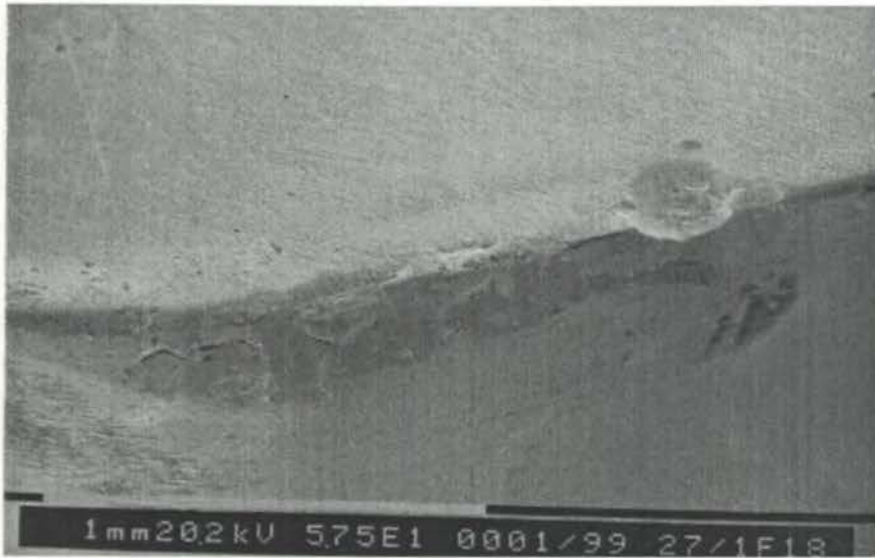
132 Overall view of a failed KMF tool showing chipping, flaking and workpiece adhesion after cutting Waspaloy for 18 minutes at 25 m/min and 0.08 mm/tooth
